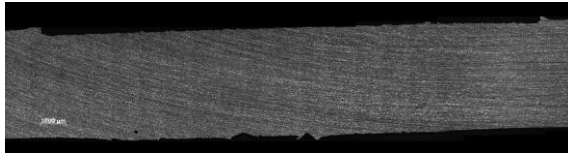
Cross-sectional image of the sample welded by Tool 1 at a feed rate of 125 mm/min
